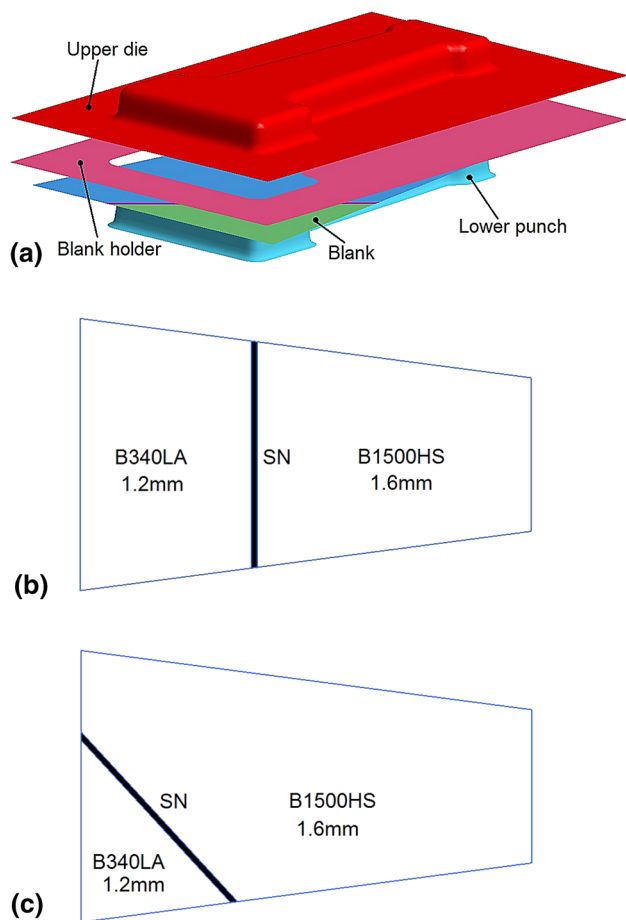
FE analysis model and contour of initial flat blank: (a) FE model, (b) blank contour with weld seam SN-A, and (c) blank contour with weld seam SN-B
